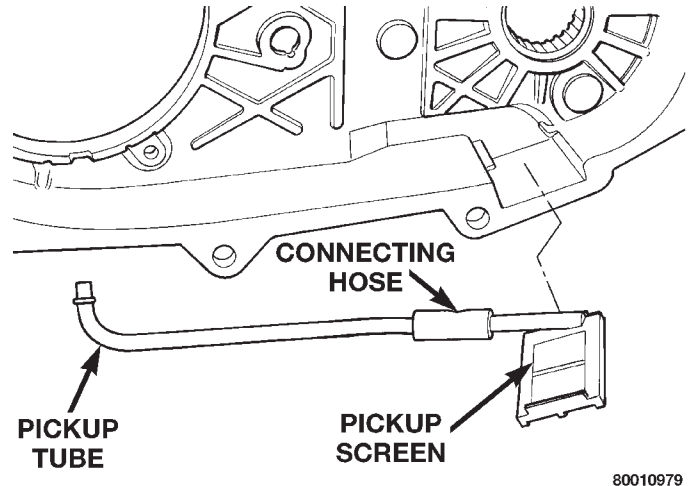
Oil Pickup Screen, Hose And Tube Removal
